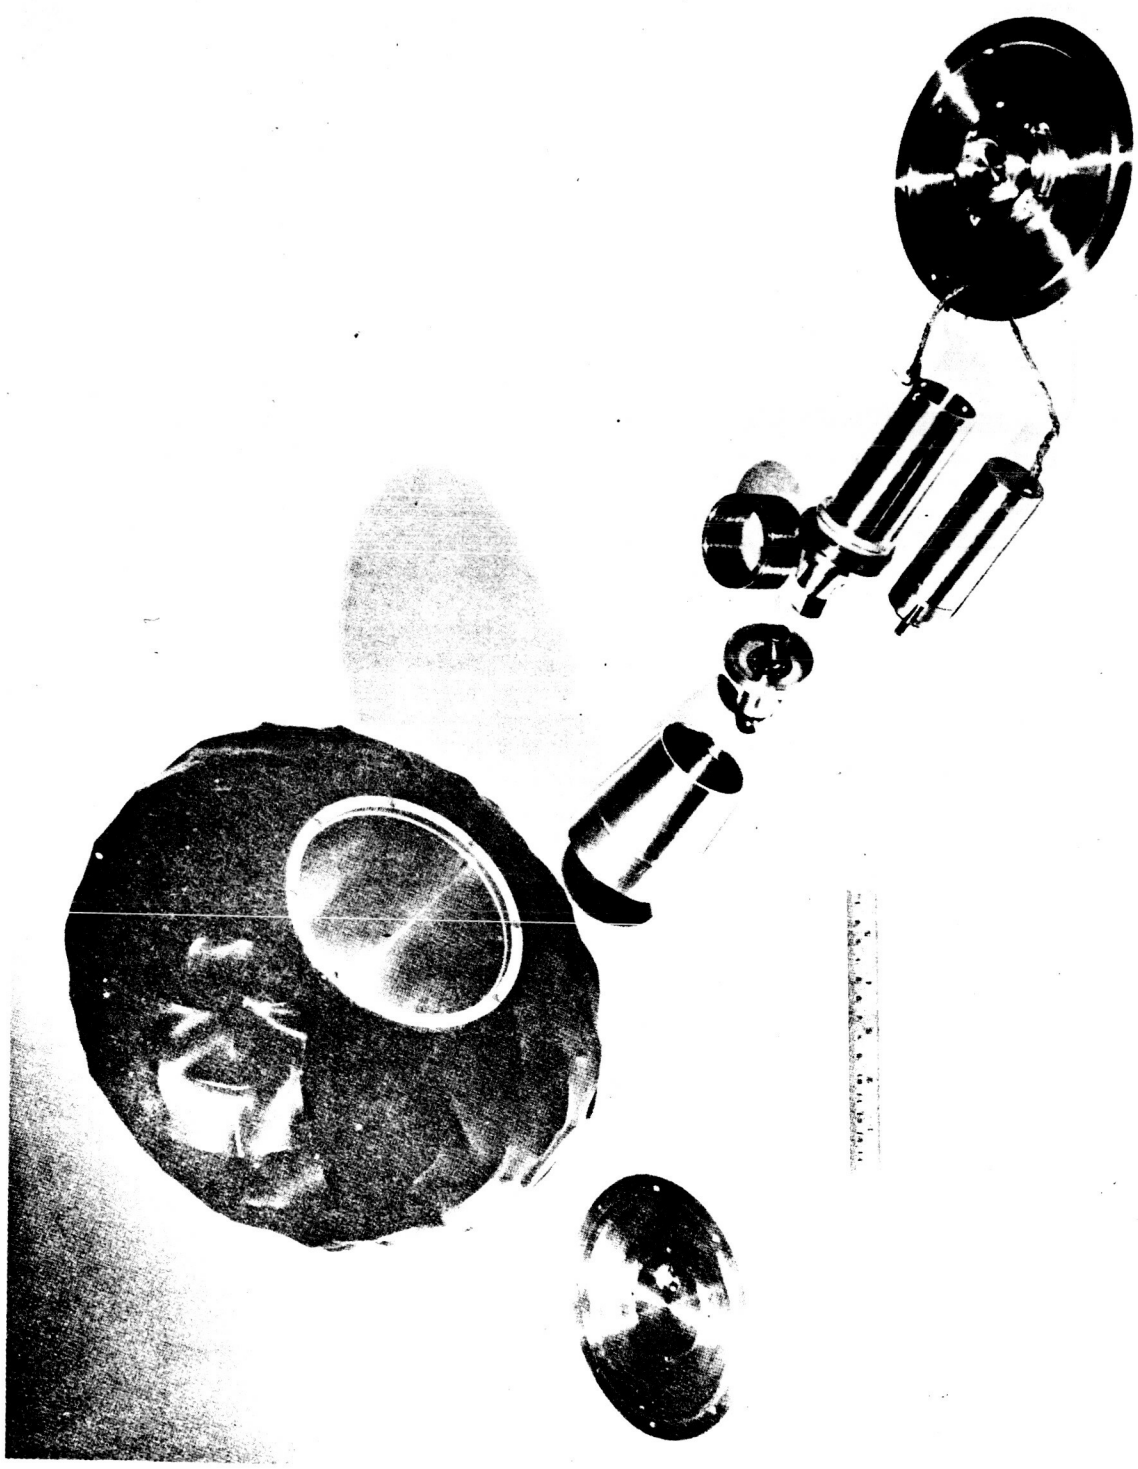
Preprototype Wheel Drive, Disassembled
